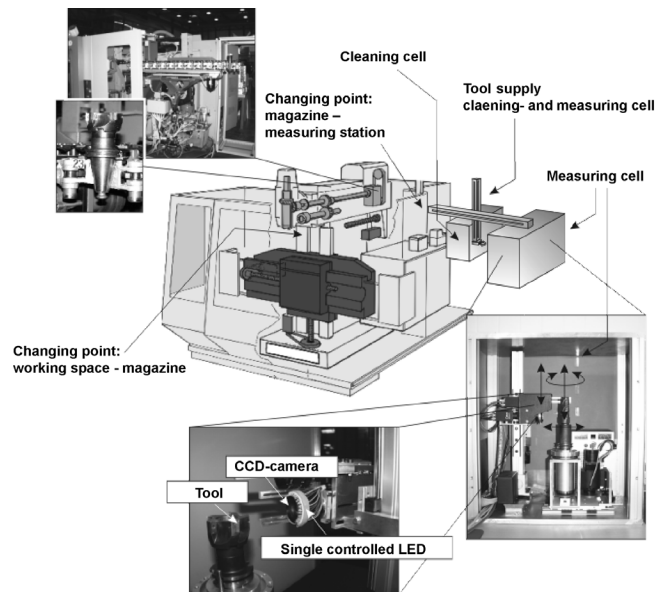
Wear tool measurement on basis of a image processing supported camera inspection system
